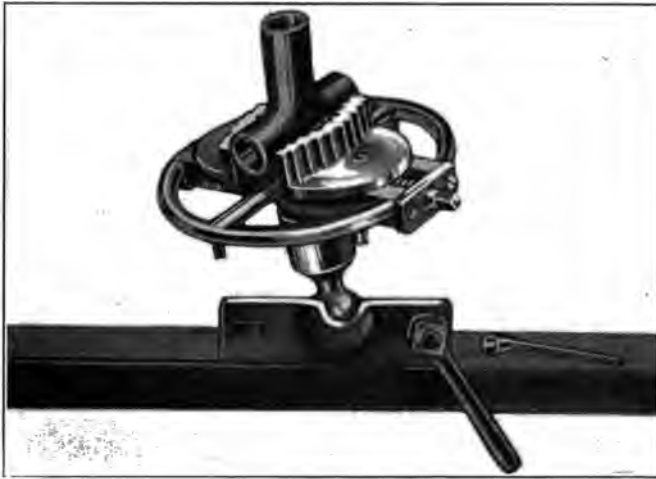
ADJUSTABLE WELDING TABLE, WITH VICE ATTACHED.
